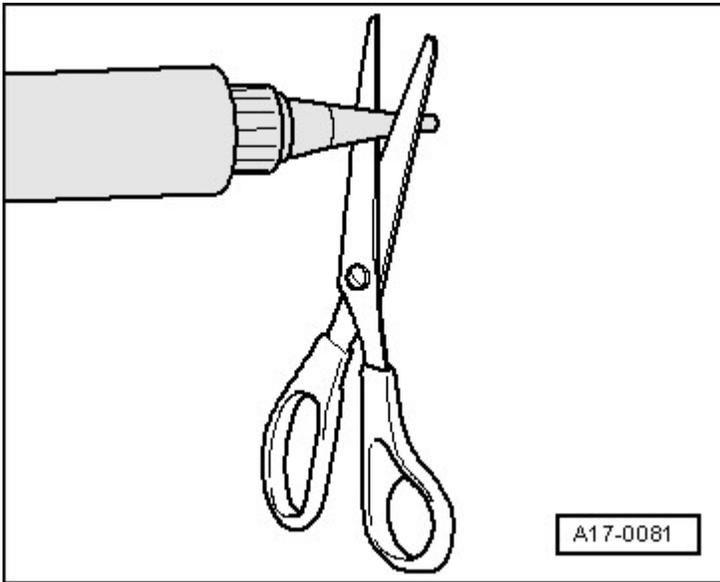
Cut Tube Nozzle At Front Marking (Nozzle Diameter Approx. 3 Mm)
